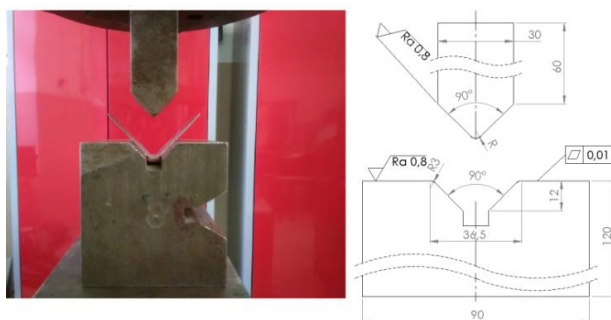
Bending tool with 90 degree working angle used in the experiment: bending tool (left), general dimensions and schematic of the bending tool (right)
